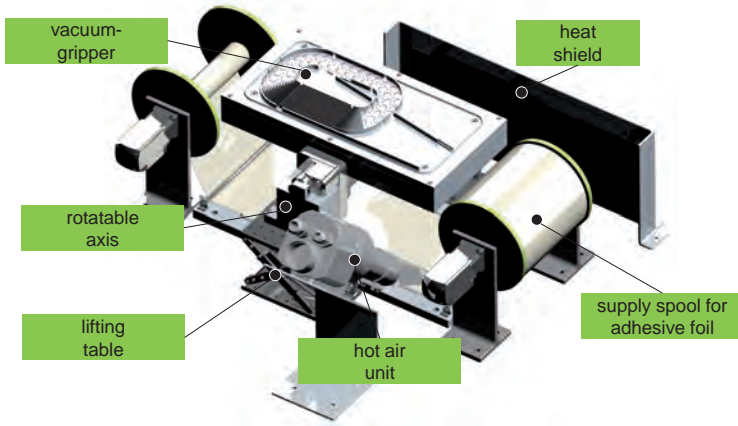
Reel-to-reel system with adhesive foils and vacuum gripper.
